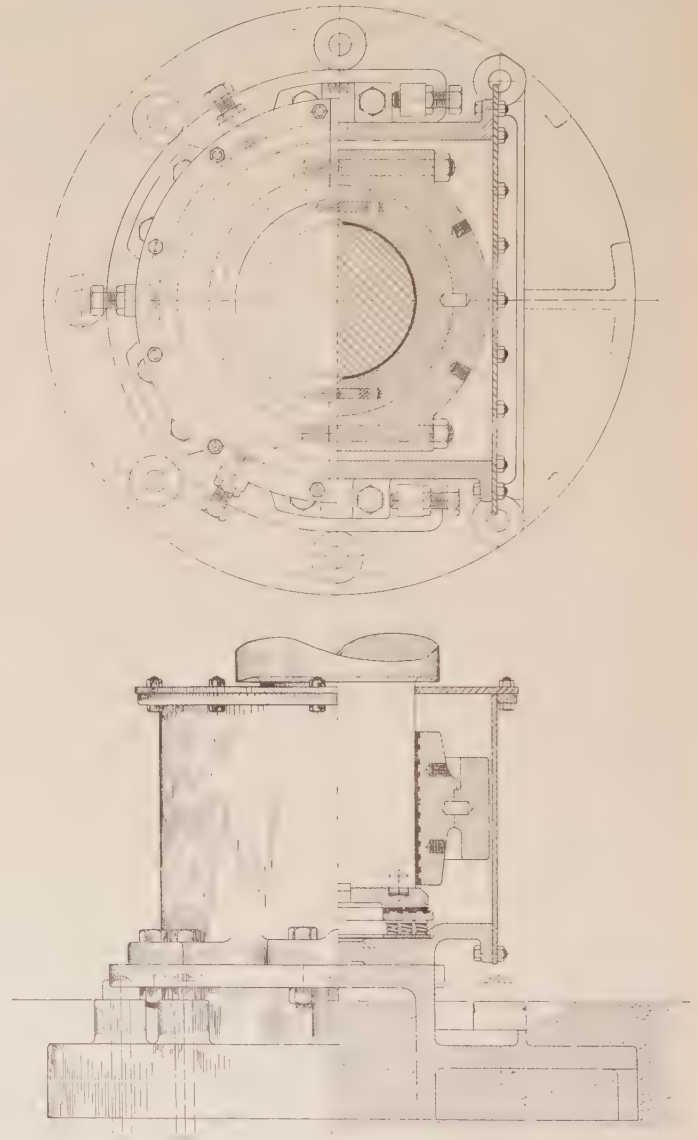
ENLARGED VIEWS OF BEARING OF MOTOR SHOWN IN FIG. 2
